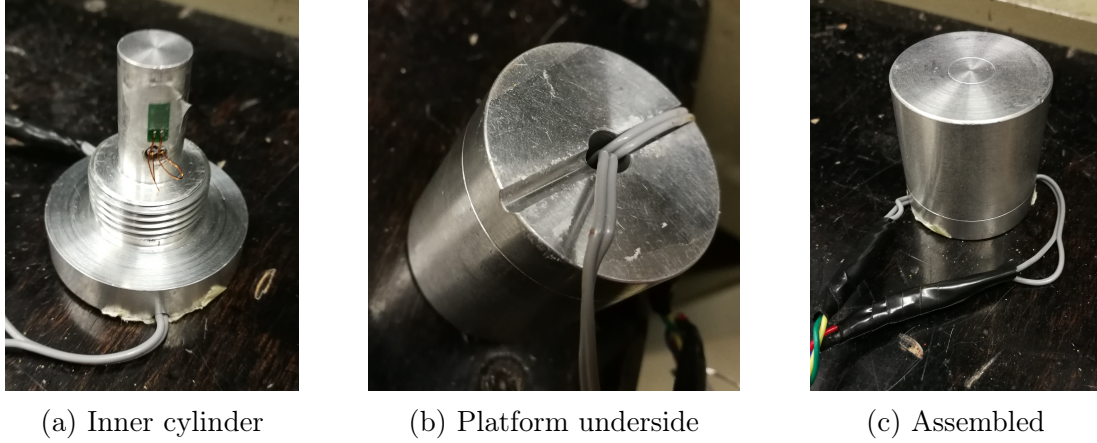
Photographs of the as-machined and strain gauged confinement platform. (a) shows the strain gauged, pasted on the circumferential face of the inner cylinder. (b) shows in hole bored out of the centre of the inner cylinder for larger deformations. Note the groove machined for strain gauge leads. (c) shows the full confinement platform, assembled with strain gauge leads in place.
